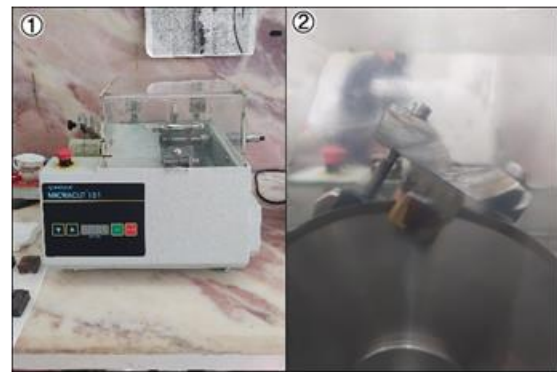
1) Precision cutting machine, 2) Cutting metals.
